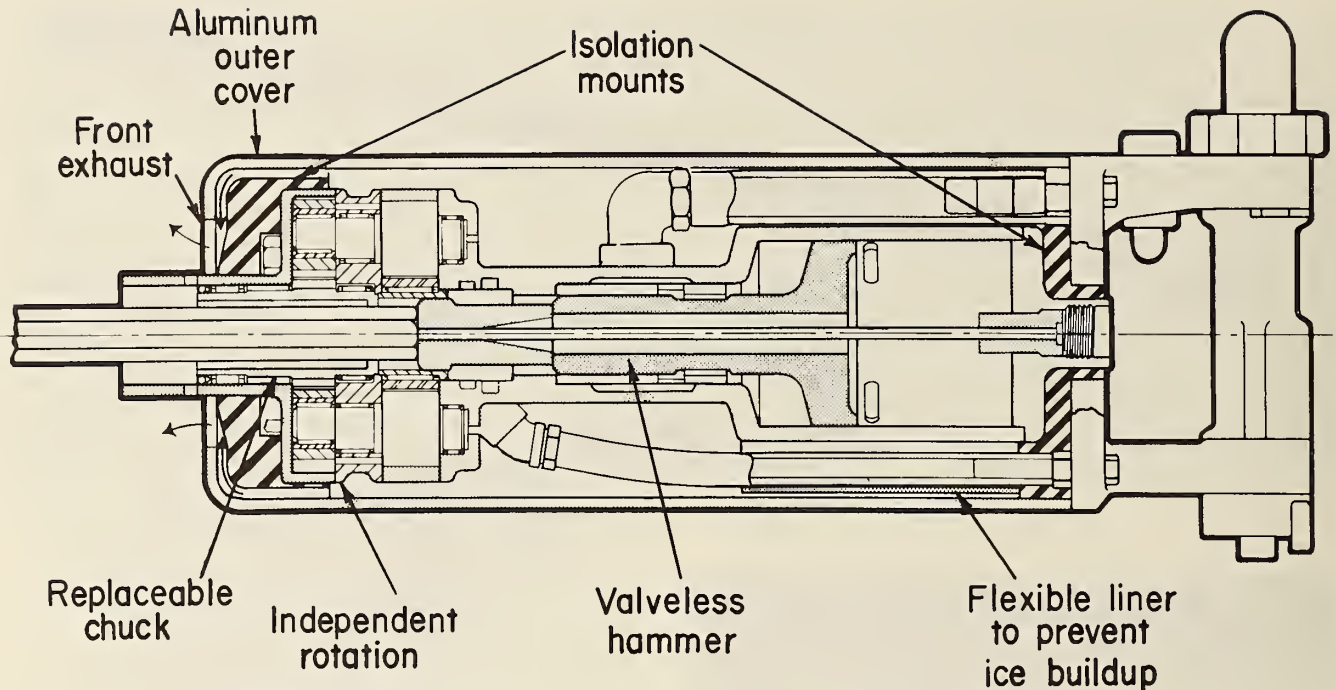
Internal components of redesigned "quiet" stoper drill.
